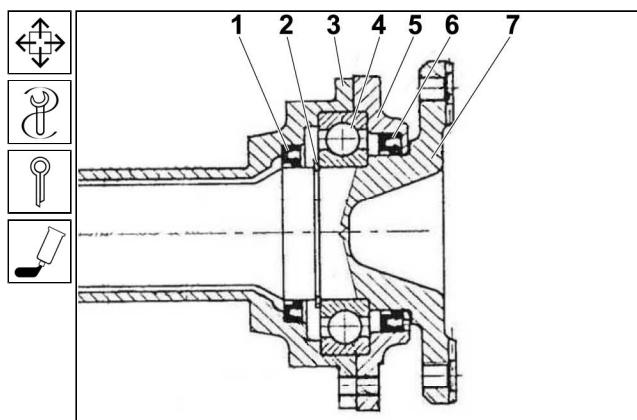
Clutch shaft c/w bushing and cover - assembly
